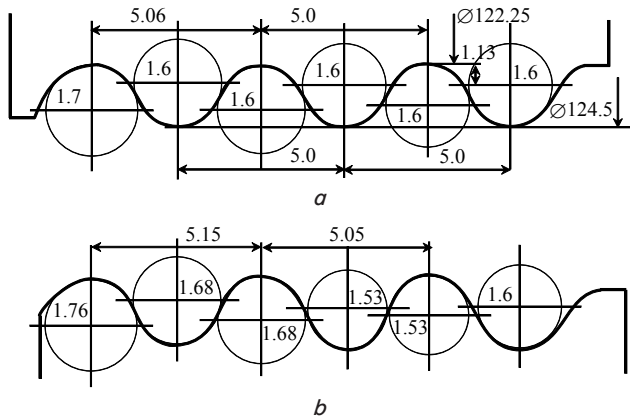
Scanned actual profiles, their geometric dimensions and shape (mm): *a* – thread of fuse; *b* – thread of hole in the ATM shell
